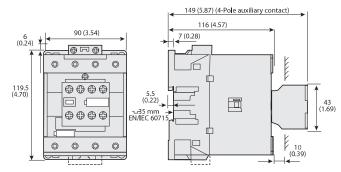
100-E80 4-Pole Contactors with Side-mounted Auxiliary Contact
